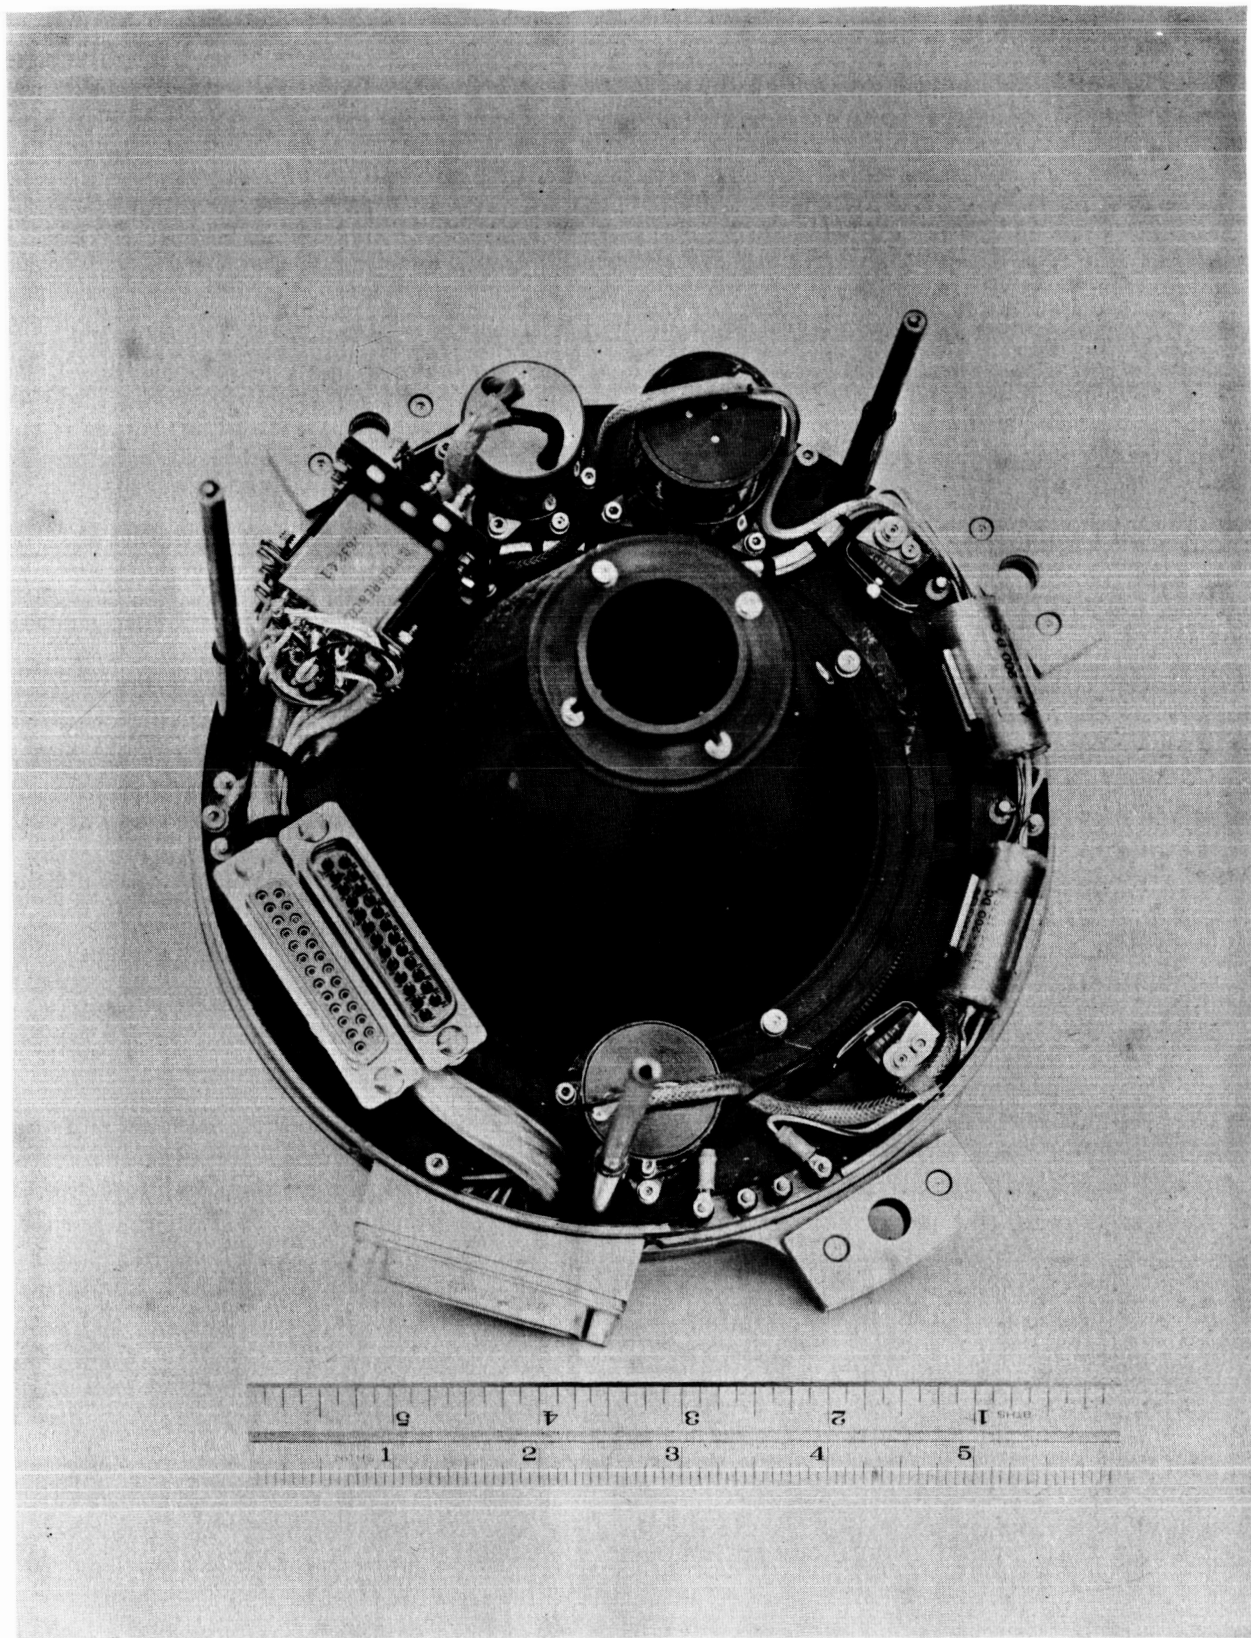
GEAR PLATE ASSEMBLY: CIRCUIT BOARD A1
